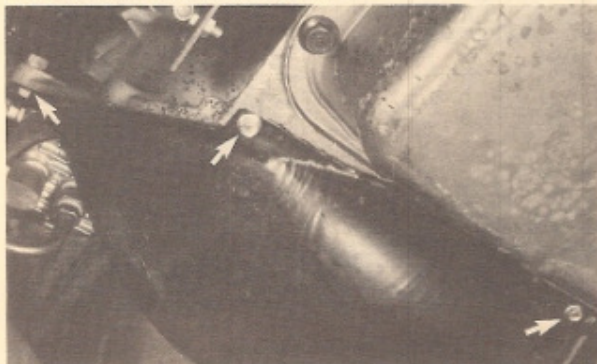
DUST COVER REMOVAL — Remove three (3) 3/8" self-tapping screws and one (1) 3/8" bolt that secures the dust cover of the transmission.
